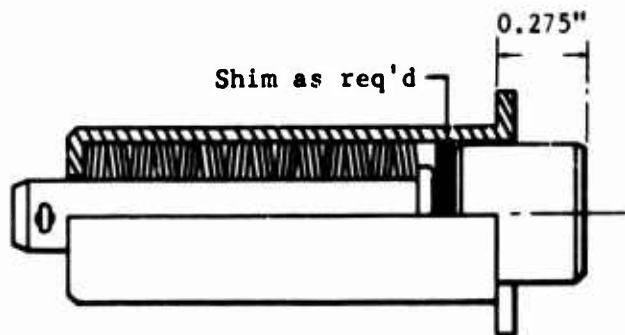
Shimming Tail Rotor Hub Spring Assembly (P/N 204-011-801).
